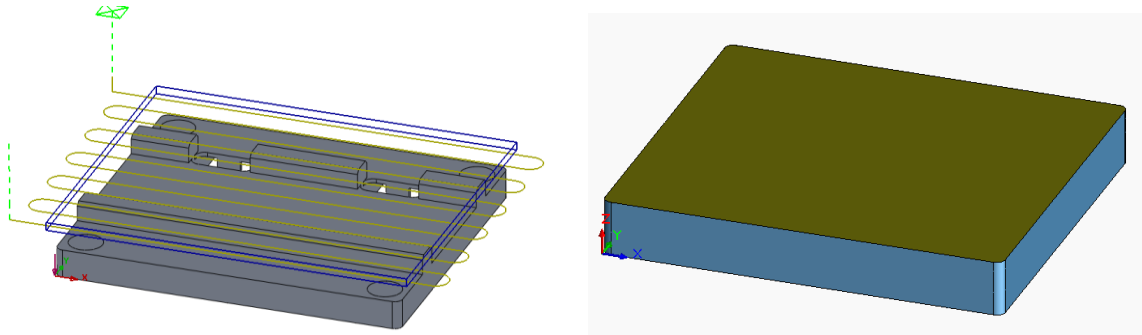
Machining bottom of quick mount plate (a) Tool path (b) Machined result
